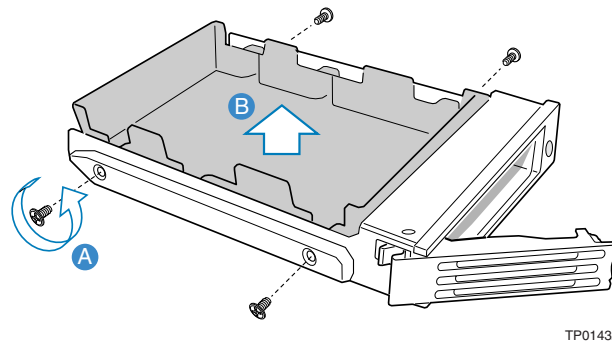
Removing the Air Baffle from the Hard Disk Drive Carrier
